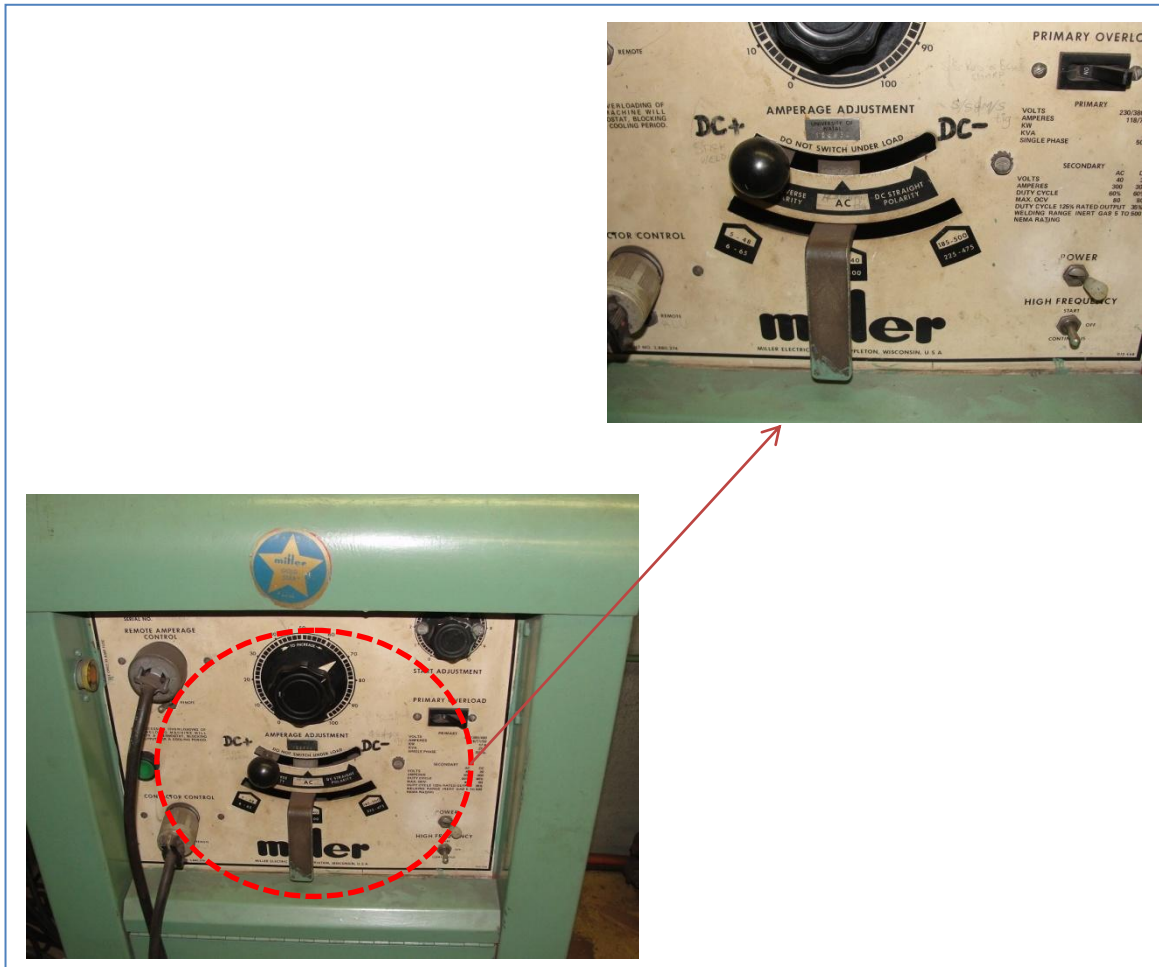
The Miller A330/BP TIG Welding Machine
